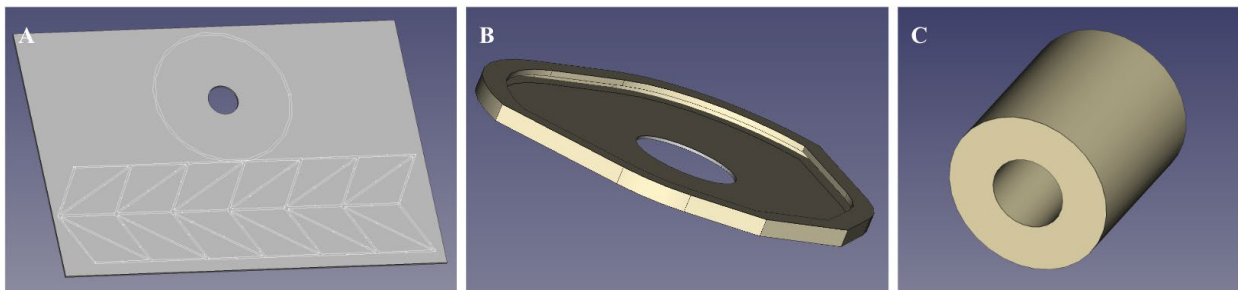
3D printed porous titanium endplates. A) Sample piece. B) Bottom endplate. C) Top endplate.
